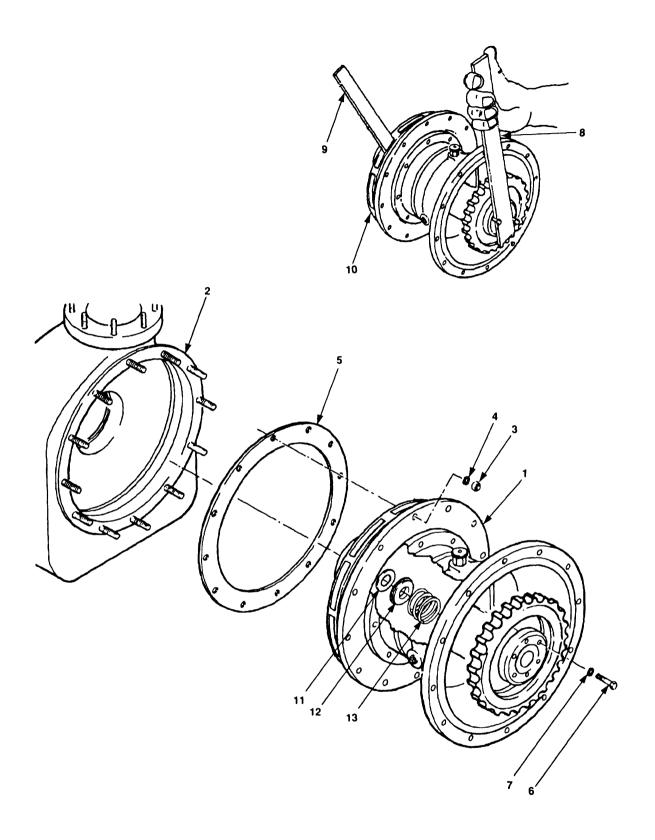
Impeller Maintenance. (Sheet 1 of 2)
